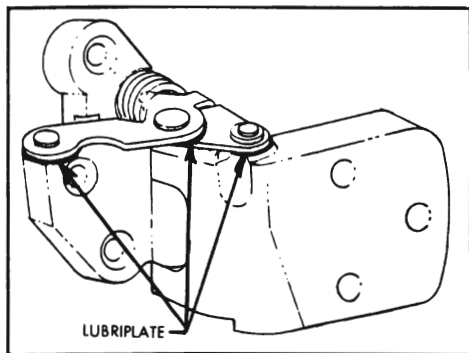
Lubrication of Rear Door Hinge and Hold-Open
